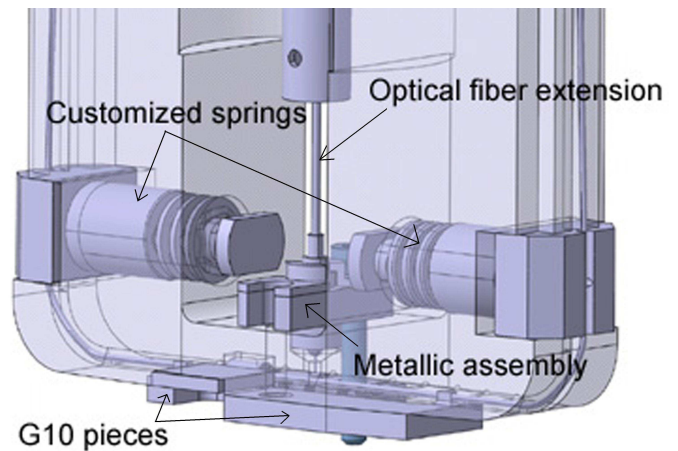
3D view of sample holder featuring clamping devices to position the tip of fiber extension and to maintain wire sample into its lodging.
